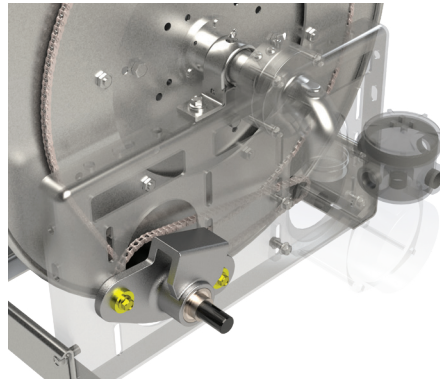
Reel with Spool & Motor Chains Attached to Reduction
